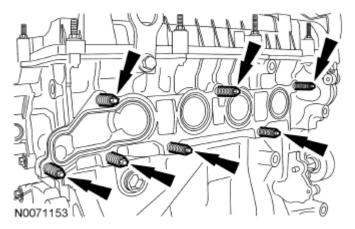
Locating Cylinder Head Studs Courtesy of FORD MOTOR CO.
